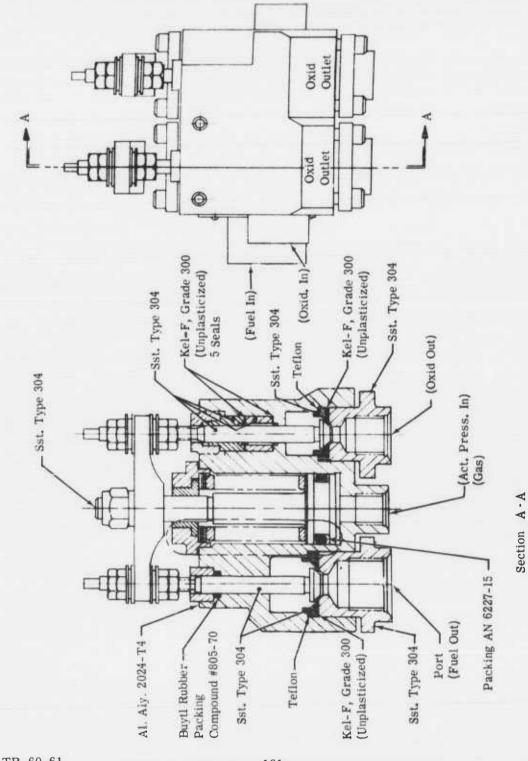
Cross Section - Valve Assembly - Propellant, Igniter and Gas Generator 62-472-367
